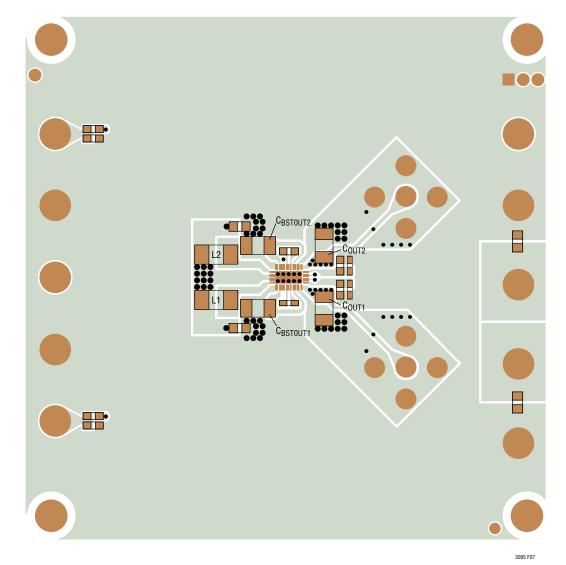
Example PCB Layout, Top Layer (Demo Board DC2270A)
